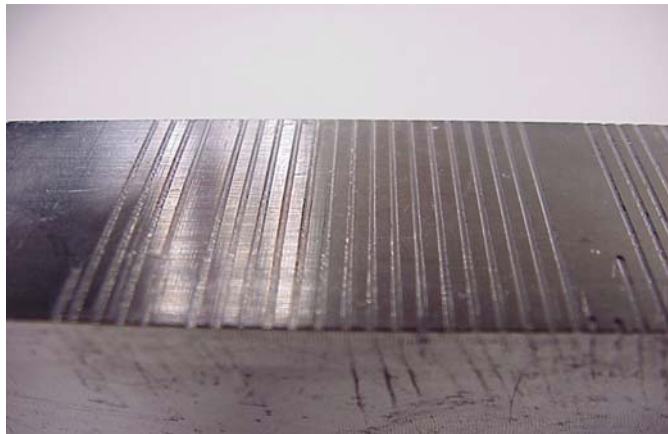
Cutting Test Slots in Aluminum Produced with a 508 μ m Tool
